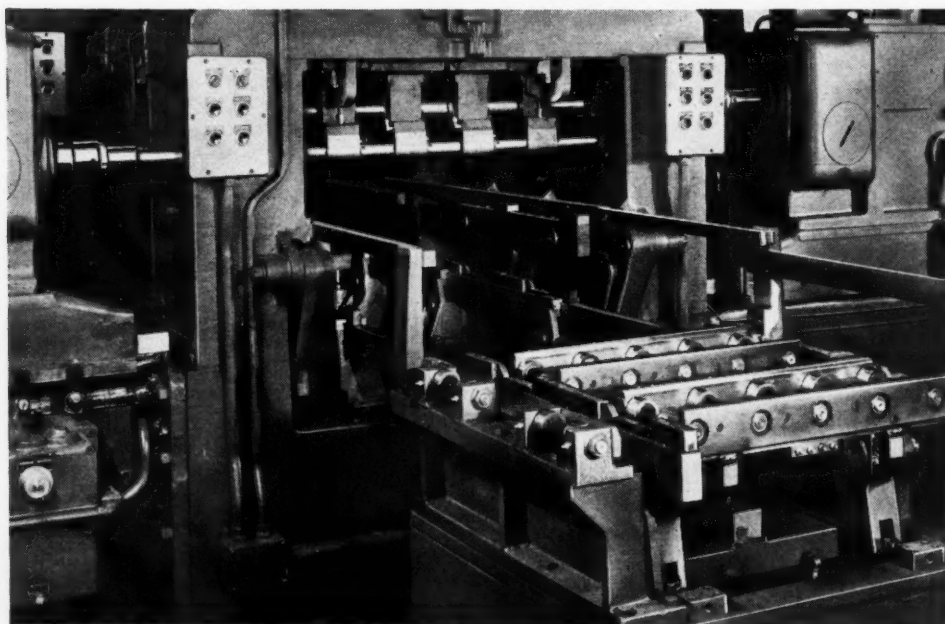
Loading Station with Engine Blocks Removed to Show Details of the Transfer and Clamping Mechanism. Bushings for Supporting the Boring Spindles can be Seen at Top Center of Machining Station at the Rear
